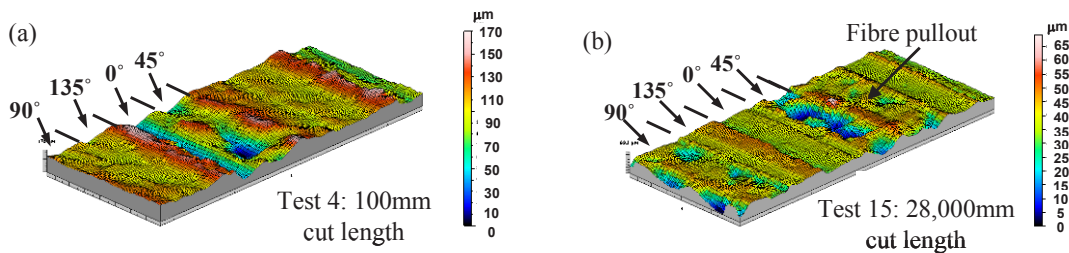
3D topography maps of surfaces machined with; (a) DLC coated WC - Test 4; (b) CMX-850 PCD - Test 15
